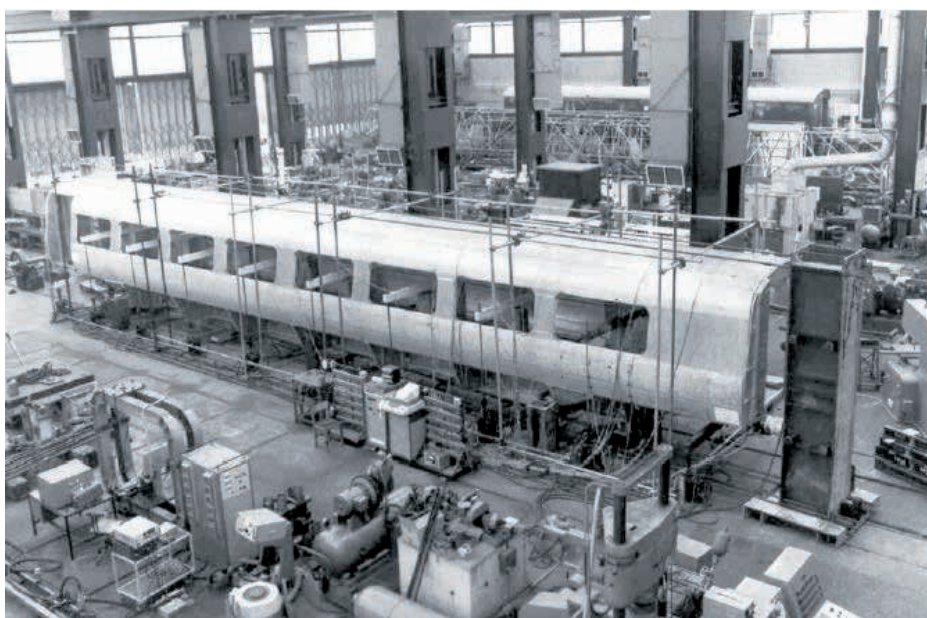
Assembling of the main frame, the side walls and the roof takes place in a positioning and welding station.
